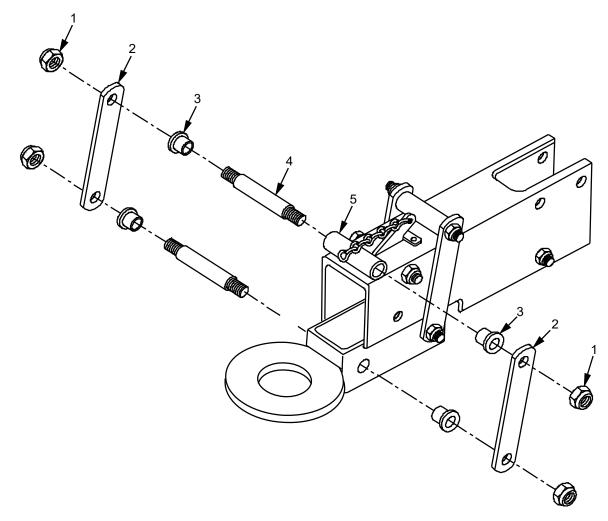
Brake Actuator Mounting Brackets Removal/Replacement.
